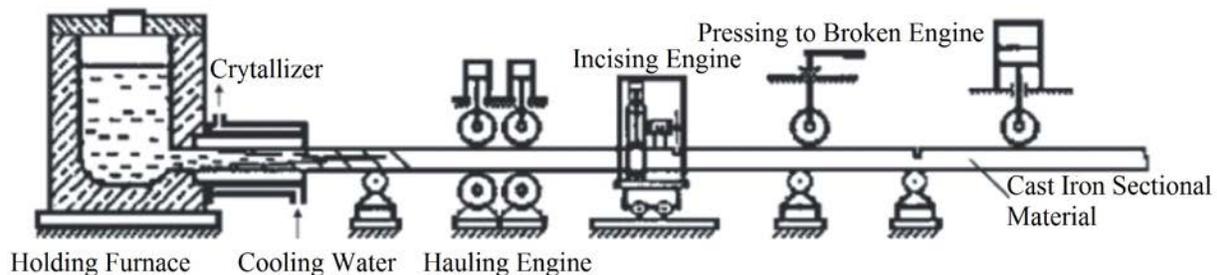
A Schematic view of horizontal continuous casting (HCC) process [50]
